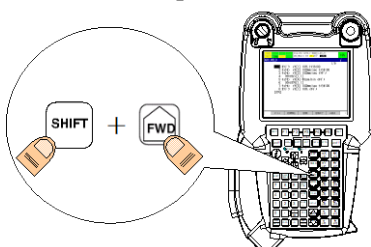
(c) Continuous Operation of Weld Program
